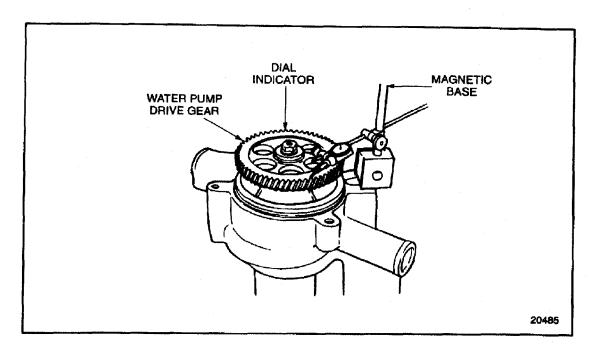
Measuring Water Pump Drive Gear Run-out
